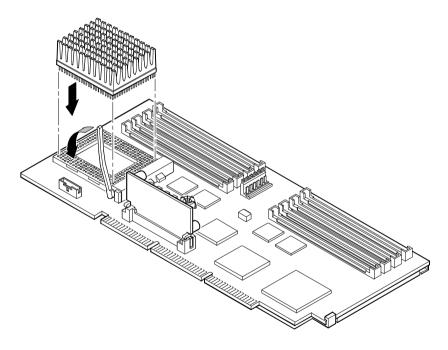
21 Releasing the Pentium® Pro Processor Assembly
